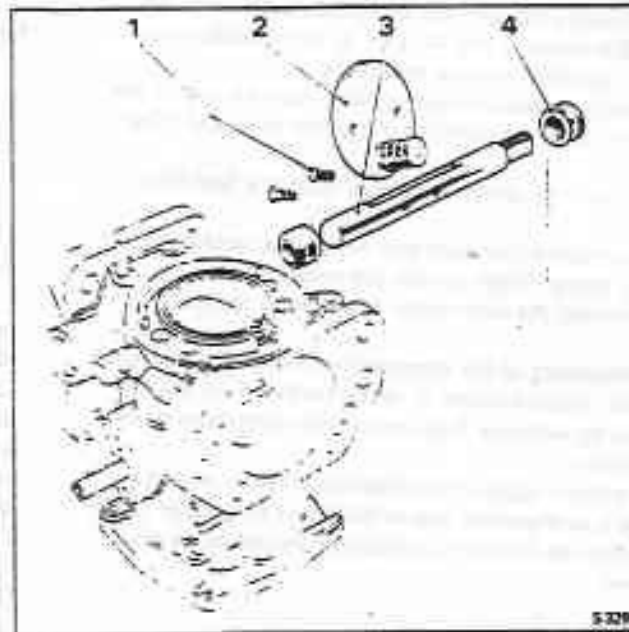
Dismantling a carburettor (throttle disc assembly)
